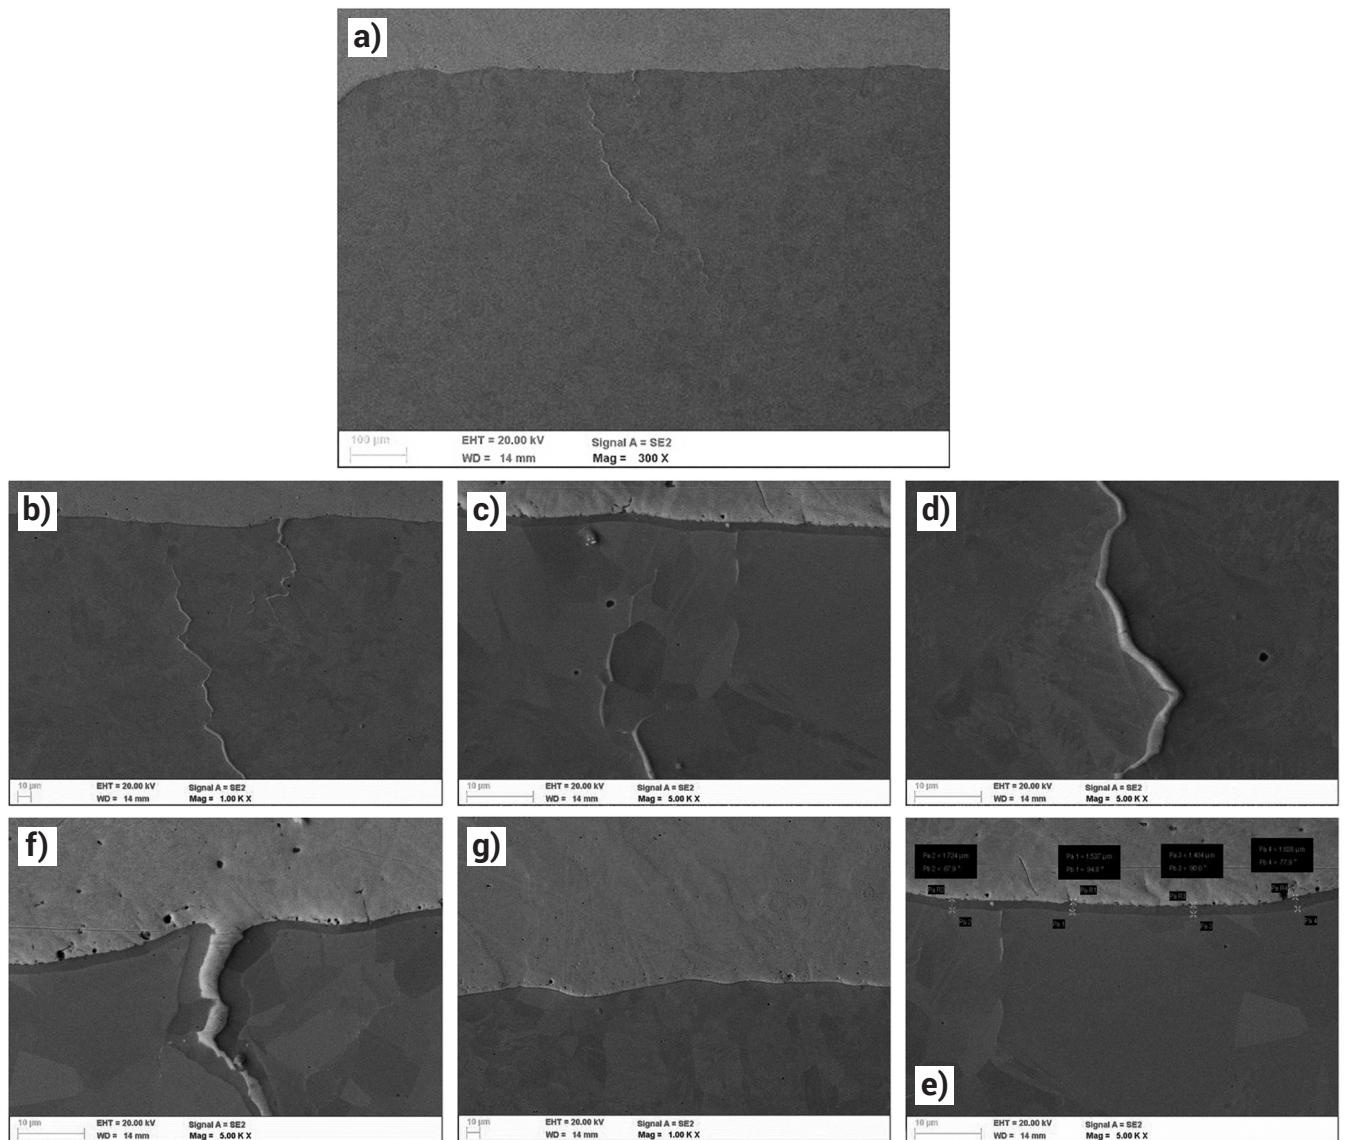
SEM picture of C1 specimen from Cu-1H18N9 braze welded joint. A view of austenitic stainless steel with braze weld – filler material: CastoMag 45706: a) general picture; b) SEM picture of intercrystalline crack in steel area (magnification x1000); c) SEM picture of intercrystalline crack in steel area (magnification x1000); d) cracks propagation on the austenite grain boundaries (magnification x1000); e) continuation of cracks propagation on the austenite grain boundaries (magnification x1000); f) non-metallic inclusions in braze weld on the steel side, parallel to steel plate surface (magnification x2000); g) non-metallic inclusions in braze weld, parallel to steel plate surface and view of diffusion layer in steel (magnification x5000)
